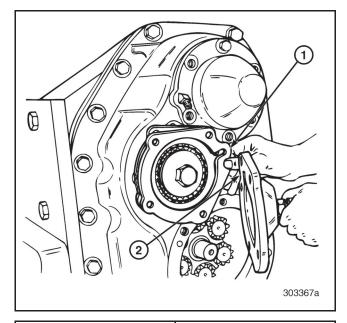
Removing Countershaft Rear Bearing Cover Capscrews
